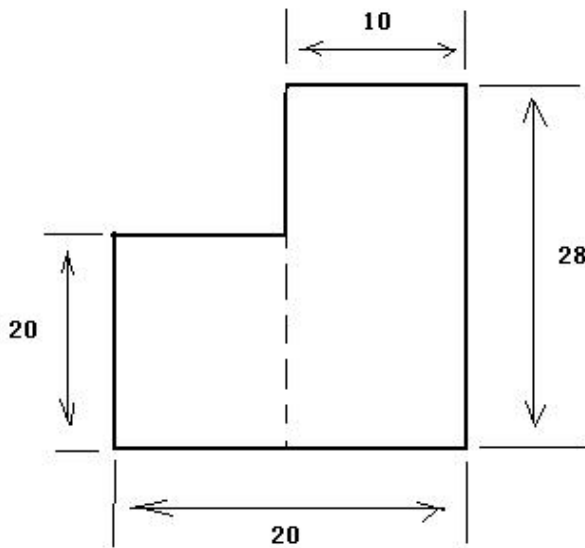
Cut the metal strip into shape. Bent along the dotted line.
